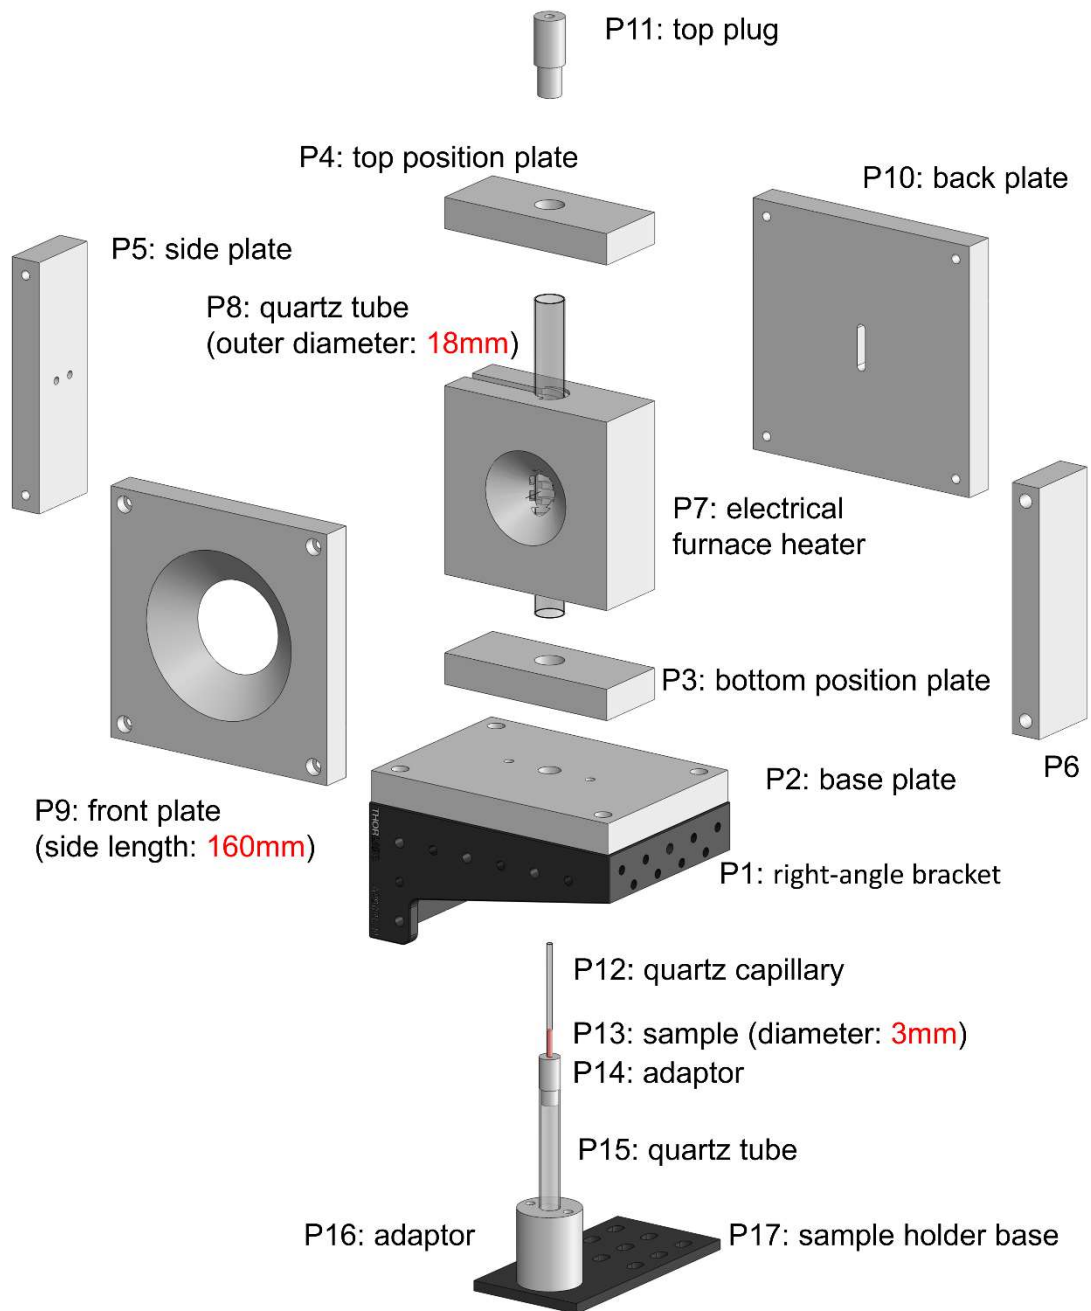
The CAD assemblies of the upgraded furnace for higher temperature SXTS and tomography experiments.
